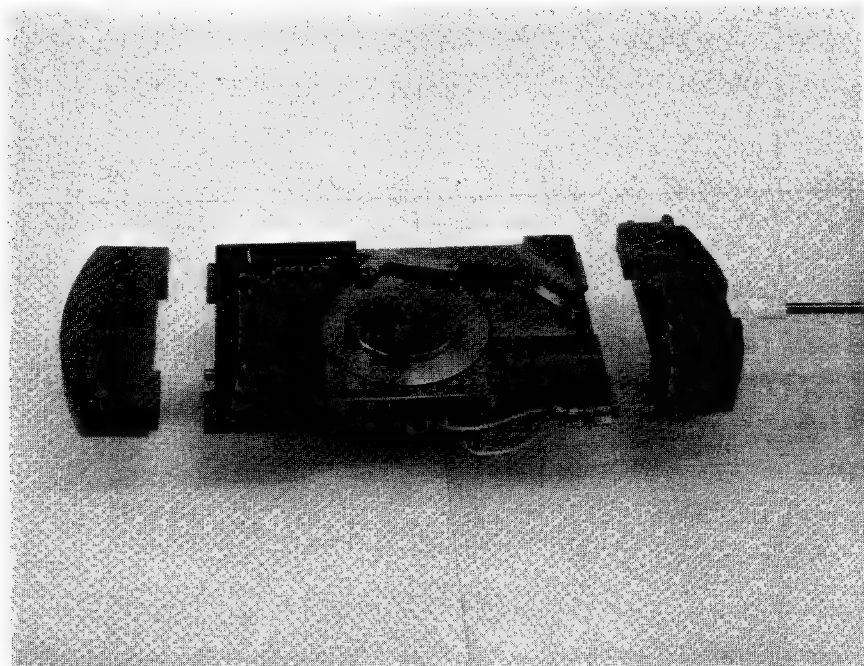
After lens assembly. Rotation of ALD coil is effected by a push rod installed in the side plate. The centre component can be removed easily during specimen exchange.
